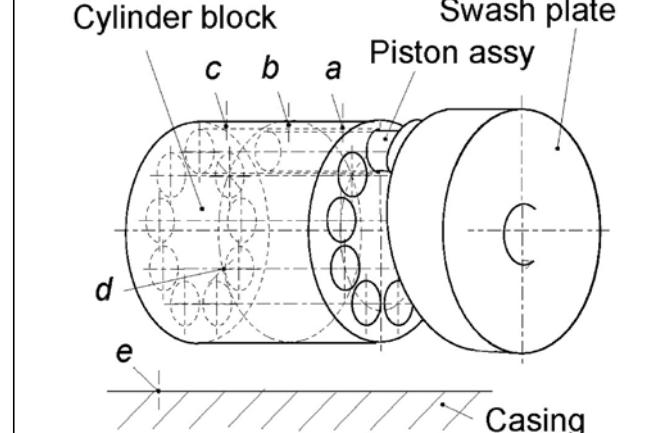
Location of thermo-couples installed in the cylinder block and casing (rotating swash-plate type piston pump)
